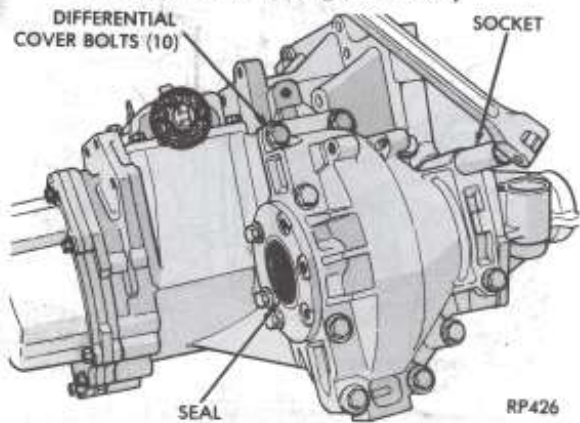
Remove or Install Differential Cover Bolts (A-520/A-555)
